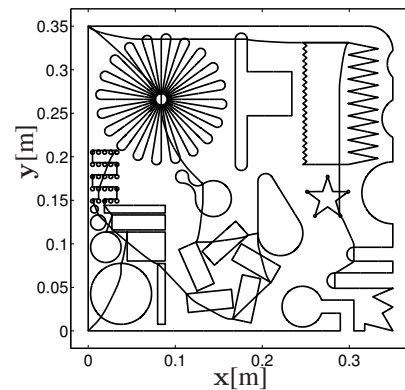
Worktool path resulting from CAD design of the parts to be machined.
